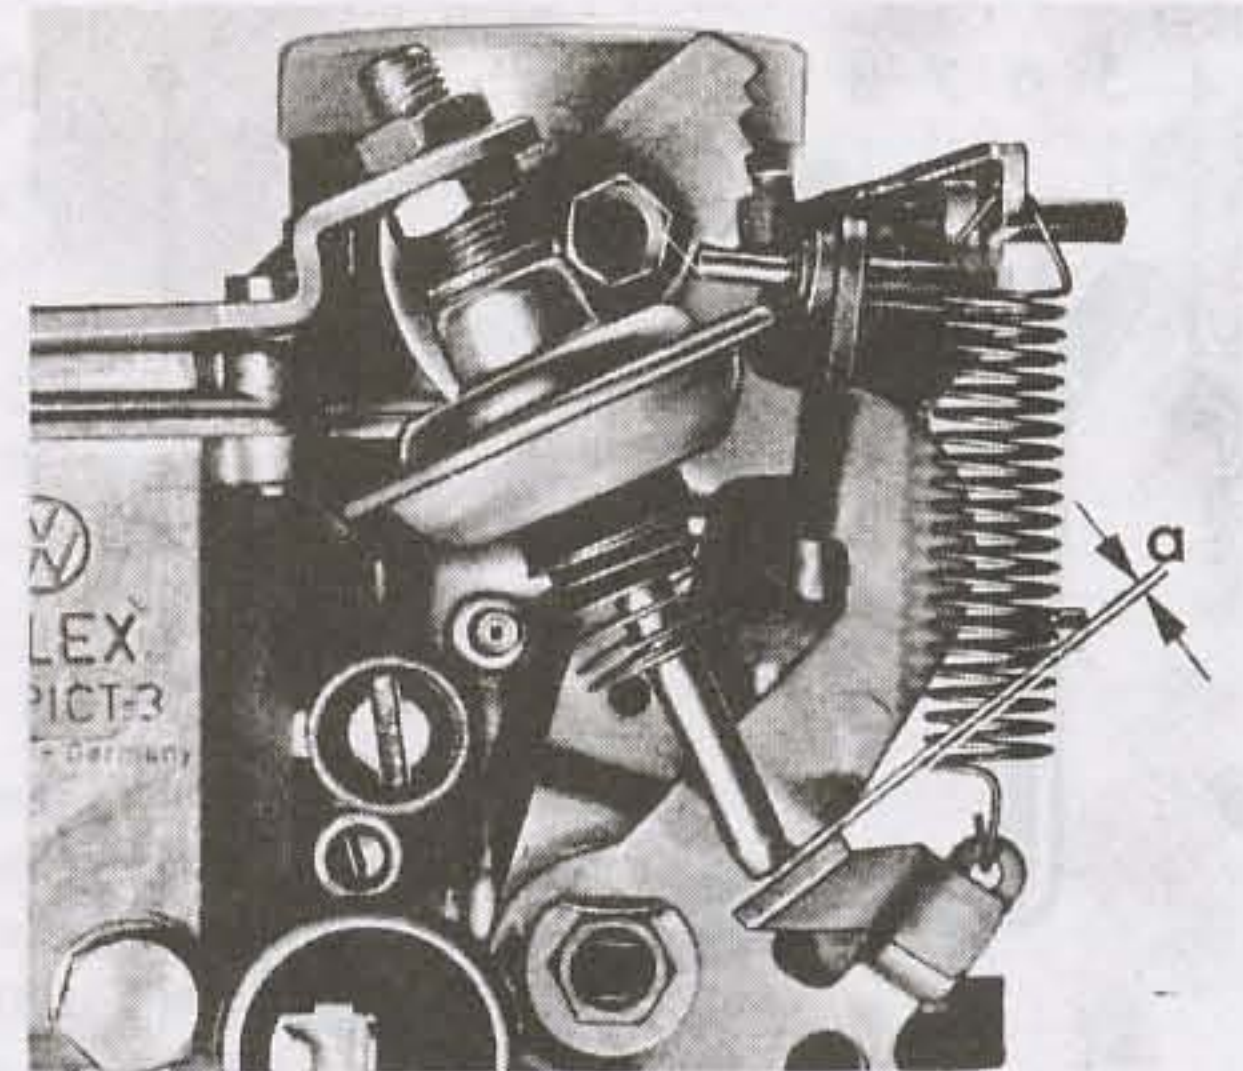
CARBURETTOR THROTTLE VALVE DAMPER
